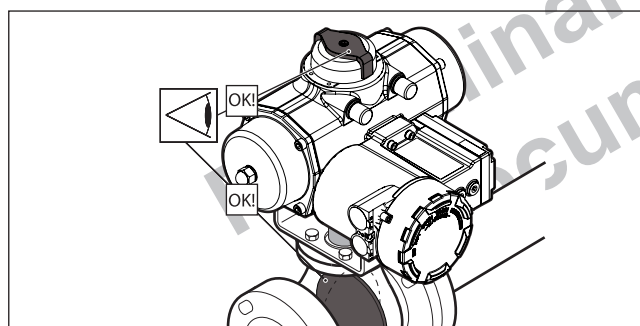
Check proper mounting before connecting air supply and electrical wiring.
